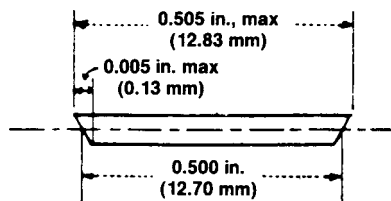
Tension Test Specimens for Sheet, Plate, and Molded Plastics
